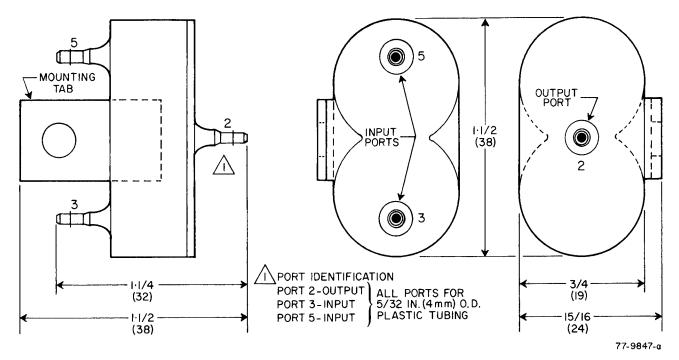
APPROXIMATE DIMENSIONS OF RP973A IN INCHES (MILLIMETERS)
